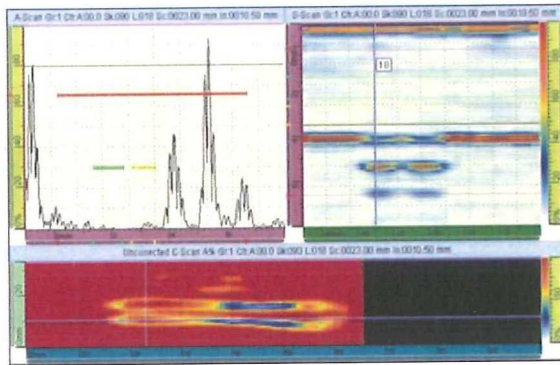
PA scan of the first clip welded. The weld is still in an early stage as some sections of the ED strips have not formed a proper bond yet.
